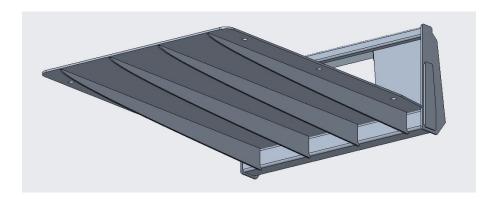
Underside isometric view of the full assembly showing the arrangement of the primary support members.
